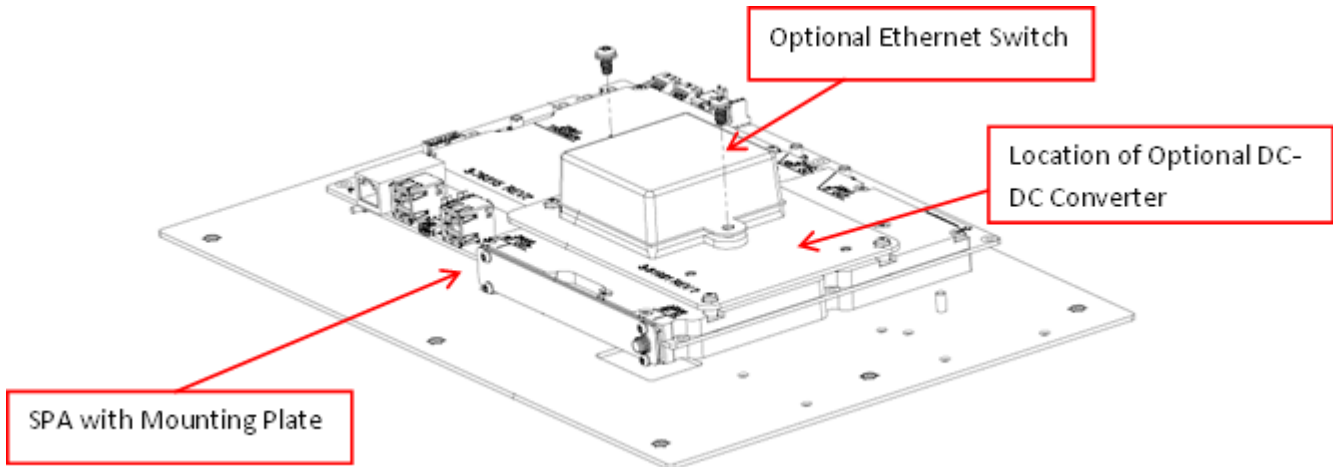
SPA Assembly with Mounting Plate and Optional Ethernet Switch
